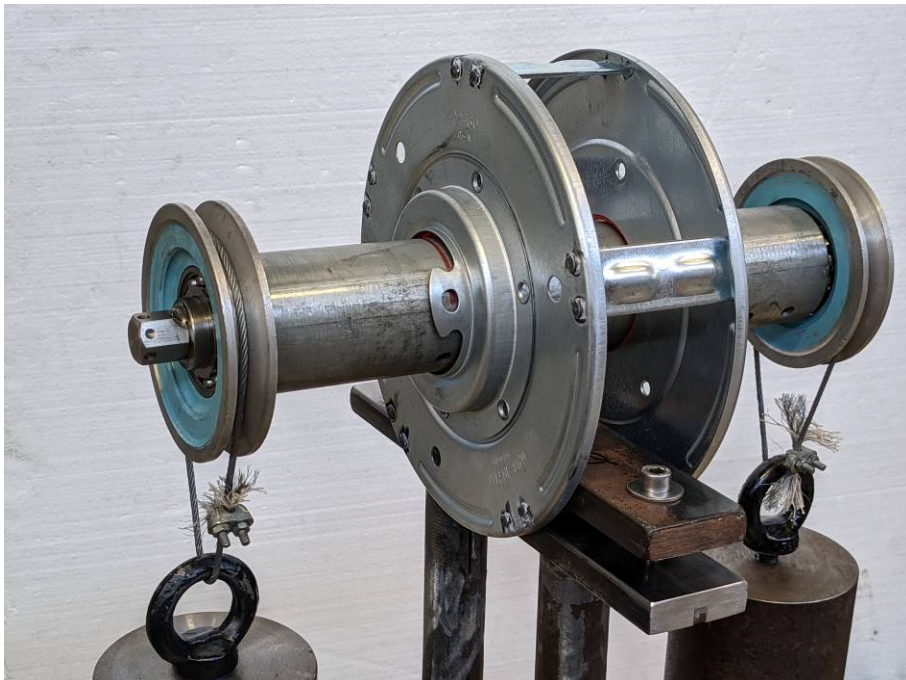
Spring box 220x60 with Masinara POM bushing
